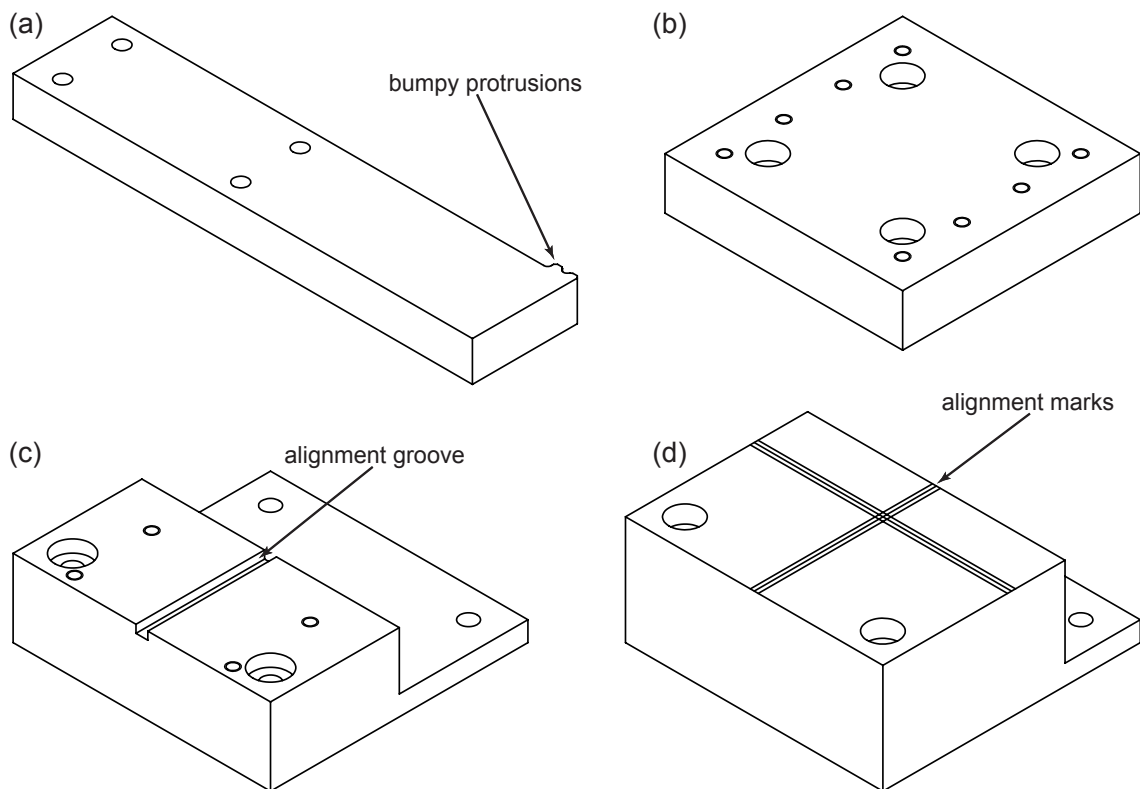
Drawings of additional hardware used for cavity assembly. (a) aluminum lever, adapters for (b) the lever and (c) the steel v-groove, (d) aluminum block.
